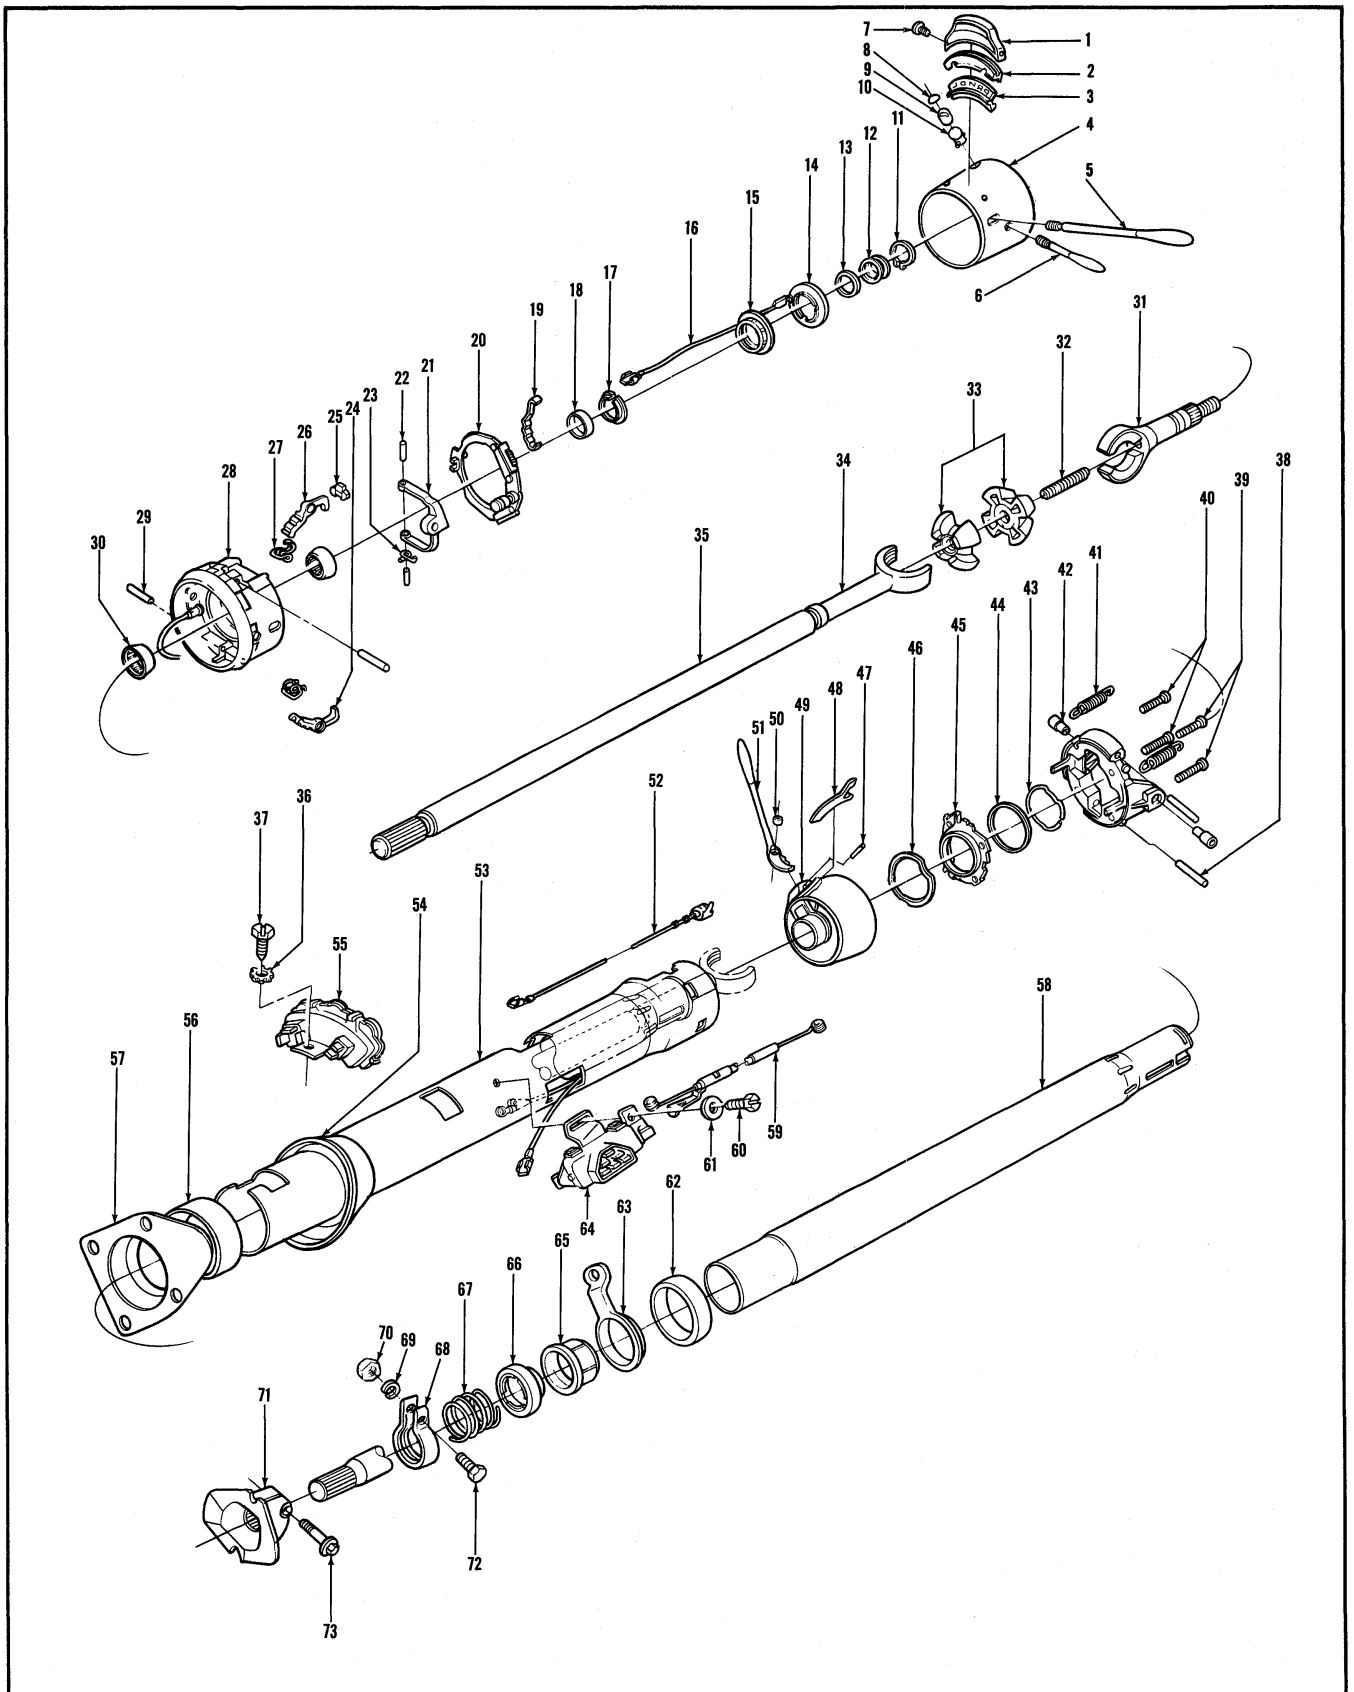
Steering Column with Tilting Wheel—Exploded View
